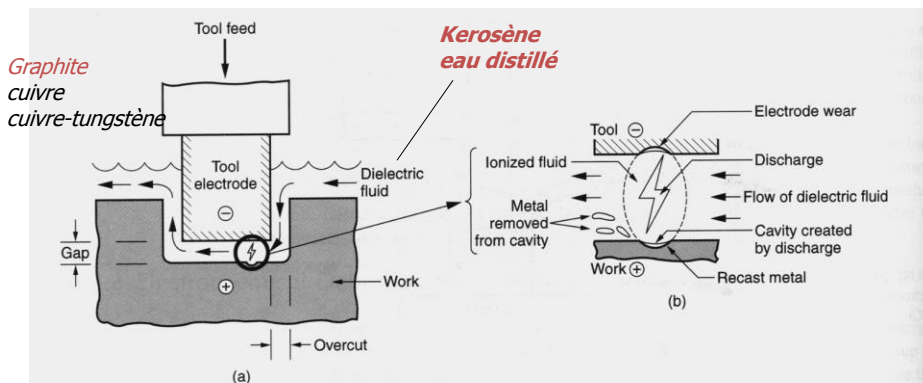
Electric discharge machining (EDM): (a) overall setup, and (b) close-up view of gap, showing discharge and metal removal.
